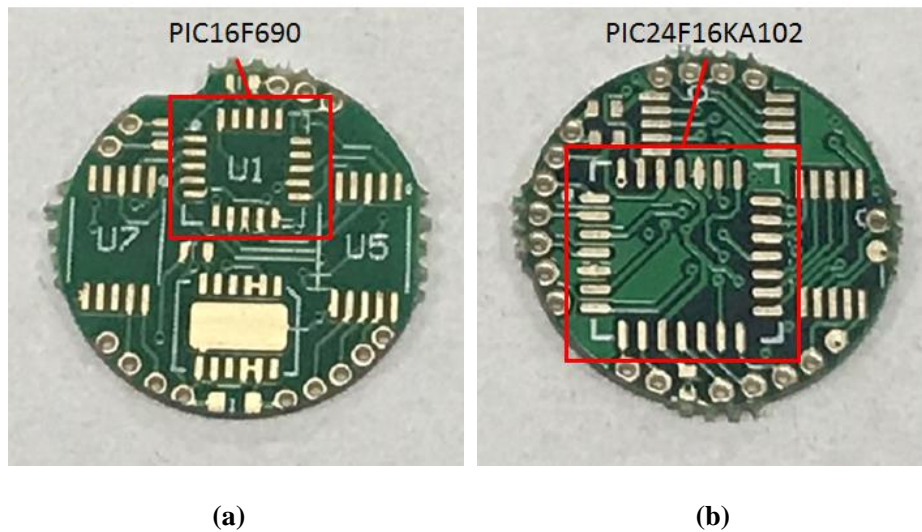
The PCB boards of the Internal and External Wireless Communication Module
